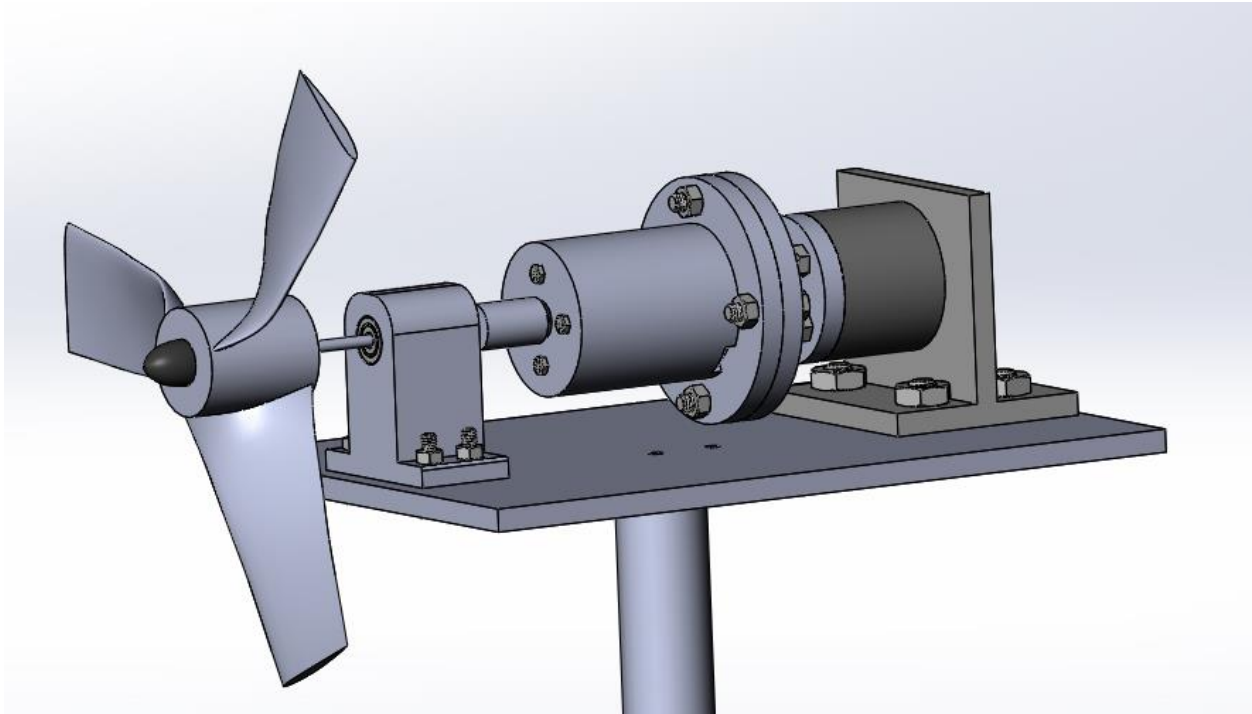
CAD model of wind turbine test fixture with reaction (non-rotating) torque transducer
